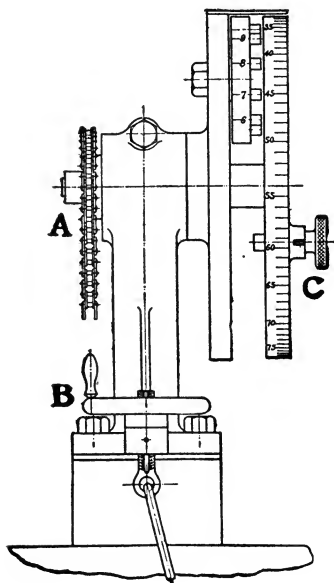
,570.—Malysheff method and attachment for determining elastic limit as used with Olsen universal testing machines. It is adapted to determination of elastic limit where threaded or headed specimens are used and the slip or give in the grips eliminated. *In testing*, the reading of the dial is taken for equal increments of load and noted and the difference between successive readings then plotted on small cross section paper and cross plotted for which the elastic limit is noted. The attachment is thrown in and out of operation by means of hand wheel shown at B.
